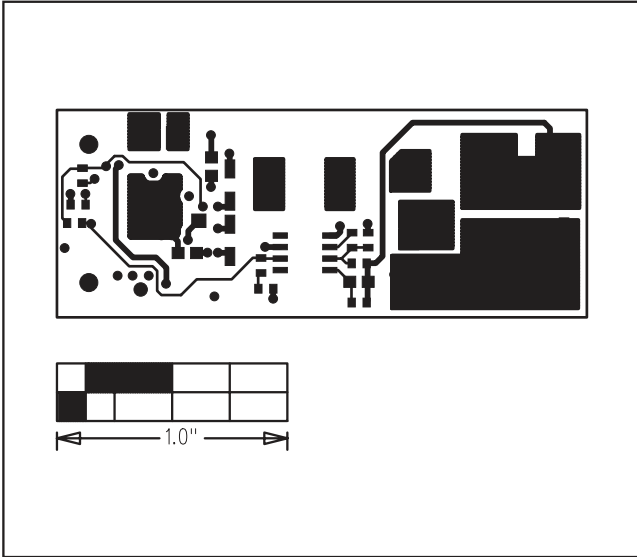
MAX5074 EV Kit PC Board Layout—Layer 4, Solder Side
